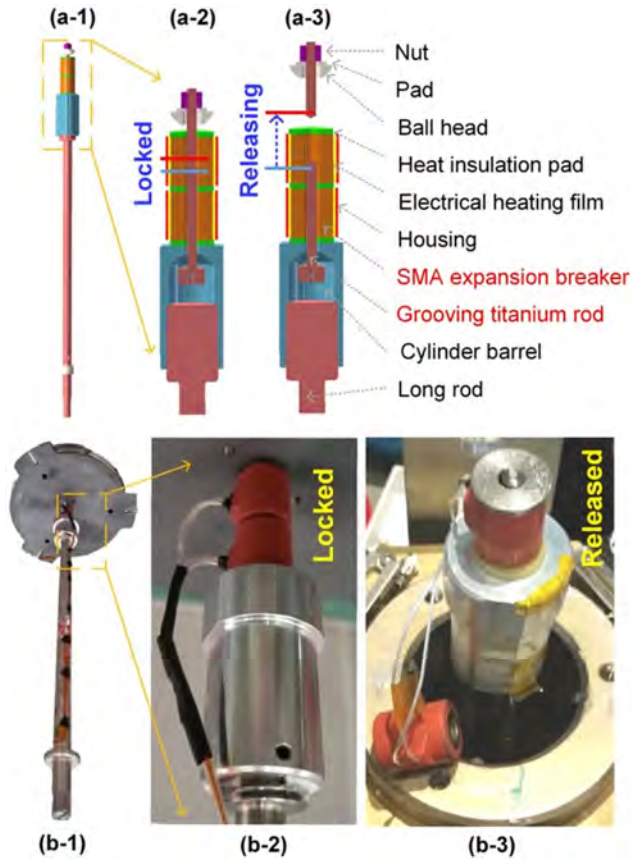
Structural design and physical objects of the SMA releasing mechanism.
